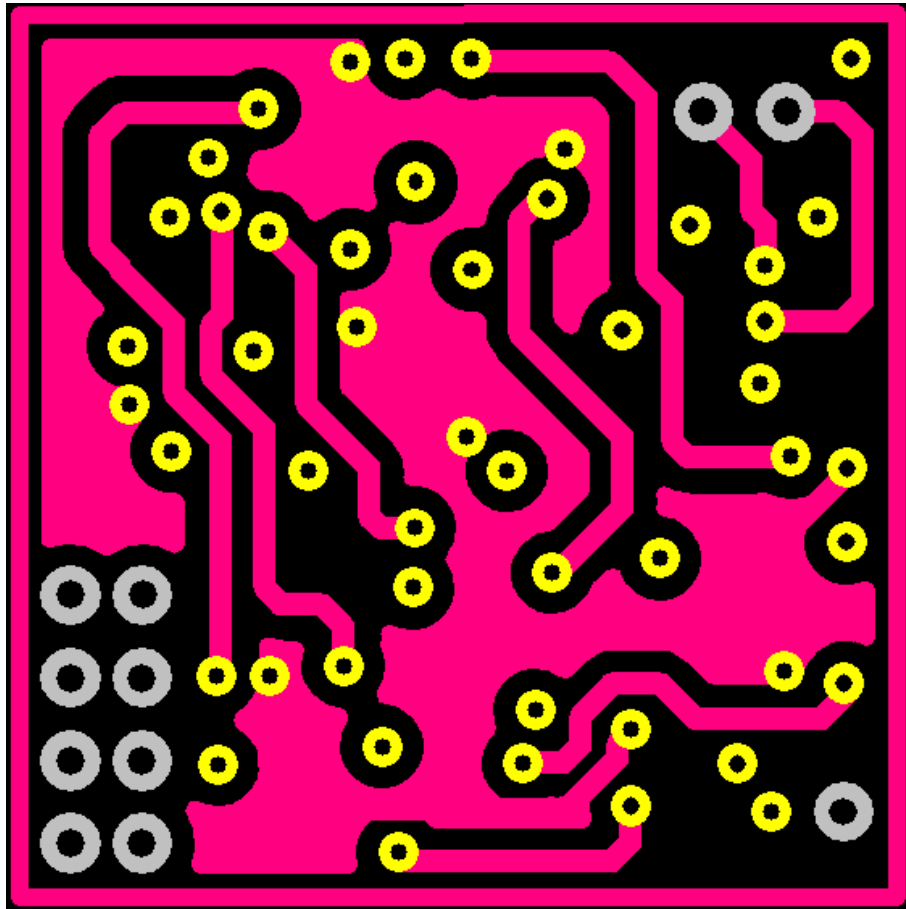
Second Layer PCB Layout of four channeled telemetry unit of the dimension 10 mm x 10 mm
